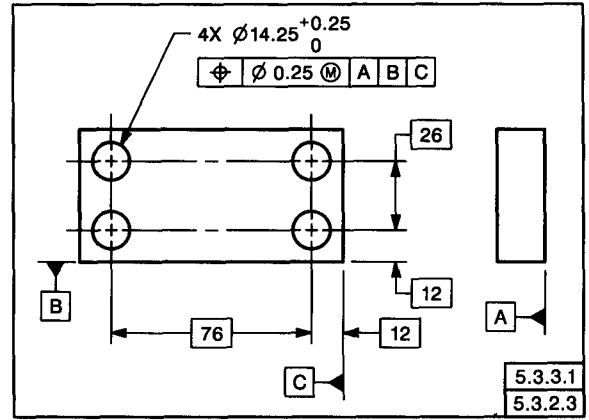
CONVENTIONAL POSITIONAL TOLERANCING AT MMC
